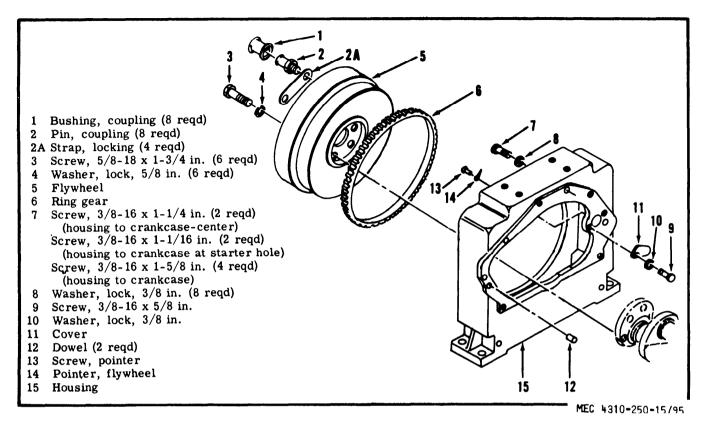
Engine Flywheel and Flywheel Housing, Disassembly and Reassembly.
